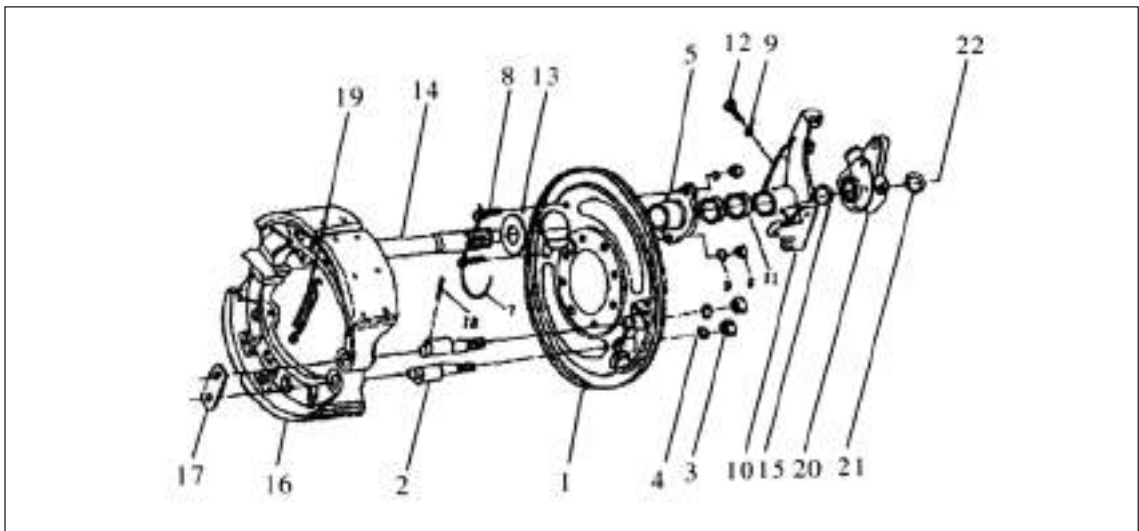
Rear wheel brake disassembling and assembling diagram
